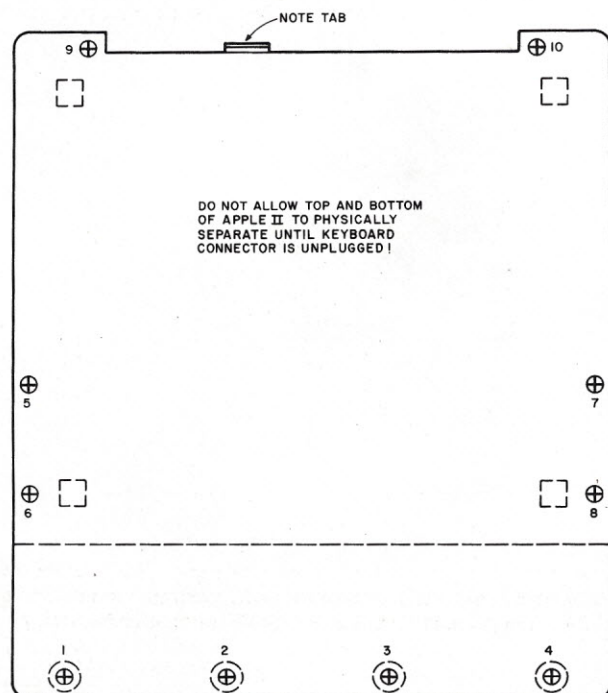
To disassemble your Apple II, remove only the screws shown here.
